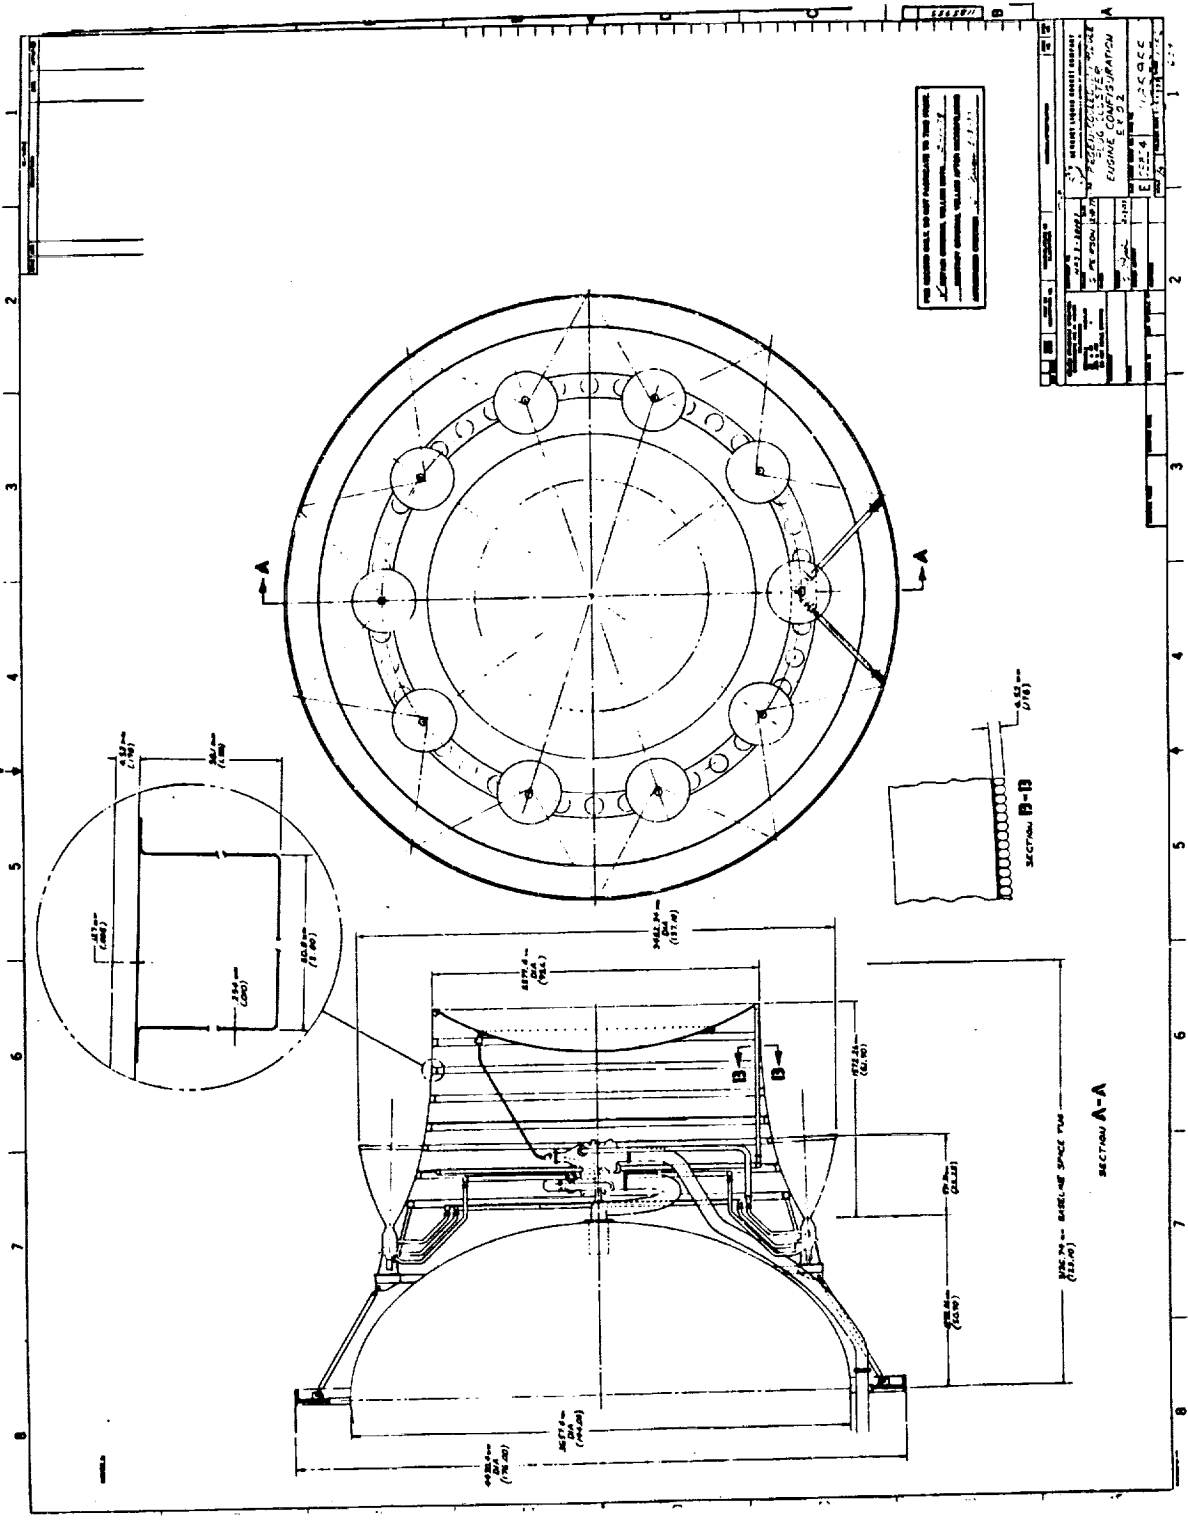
Regen-Cooled 100:1 Module Plug Cluster Engine Configuration EX02, Dwg No. 1185955 (Sheet 1 of 2)
